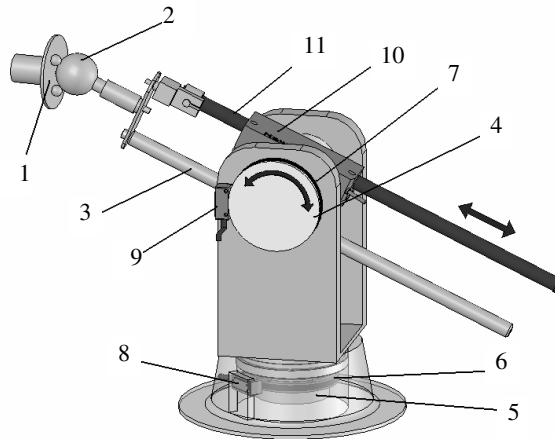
Vector Bar with ring rotary encoders and a ball linear encoder: 1 – magnetic socket, 2 – ball-and-socket, 3 – ball linear guide, 4 – horizontal shaft, 5 – vertical shaft, 6 and 7 – ring of angle encoder, 8 and 9 – read head of angle encoder, 10 – read head of linear encoder, 11 – shaft of linear encoder
